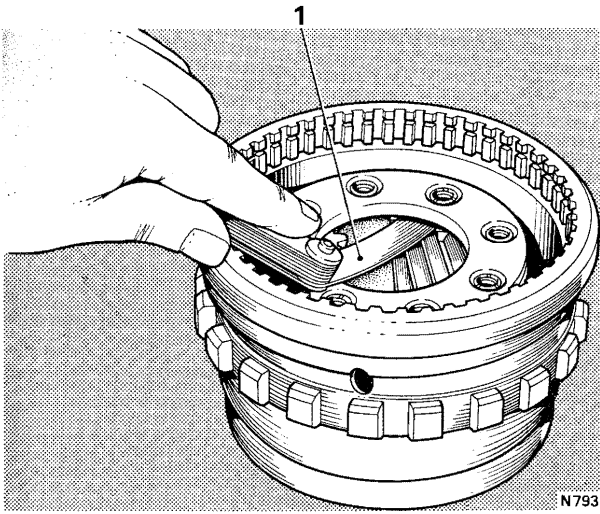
CHECKING OUTPUT CARRIER PINION END FLOAT
